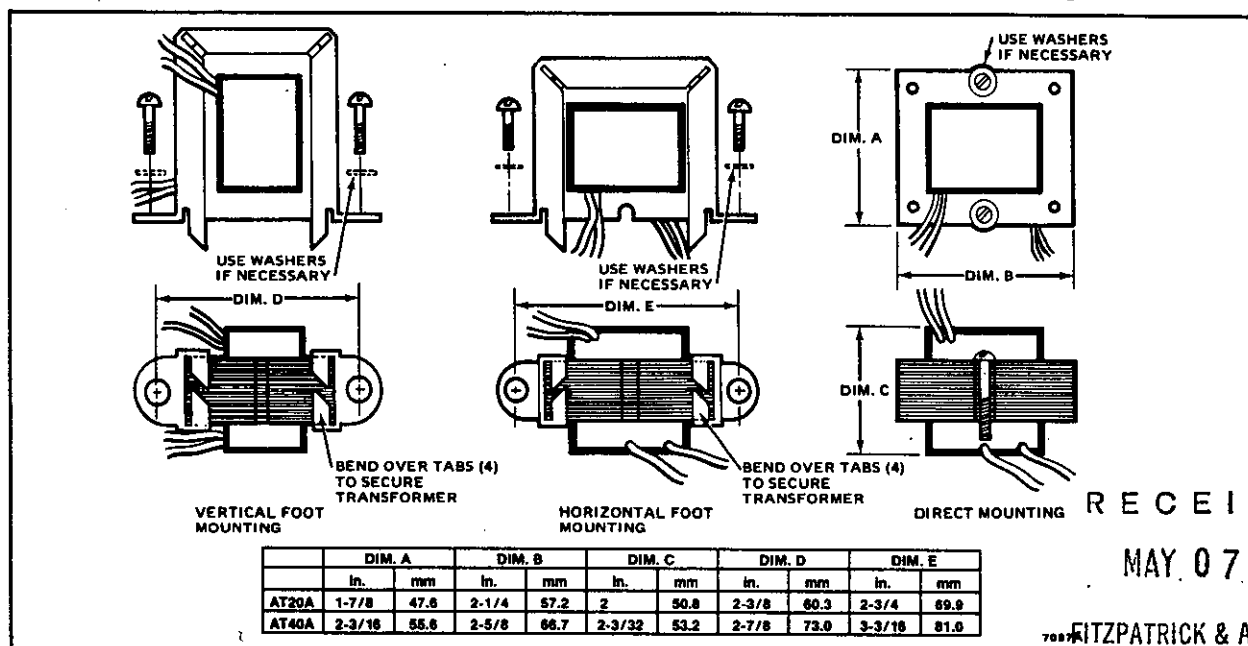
TRADELINE AT20A, AT40A DIMENSIONS IN in. [mm IN BRACKETS].
